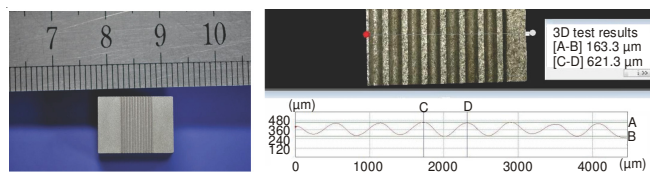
Topography of the mold core. (a) Photograph of mold core (b) Microstructural cross-section of mold core
